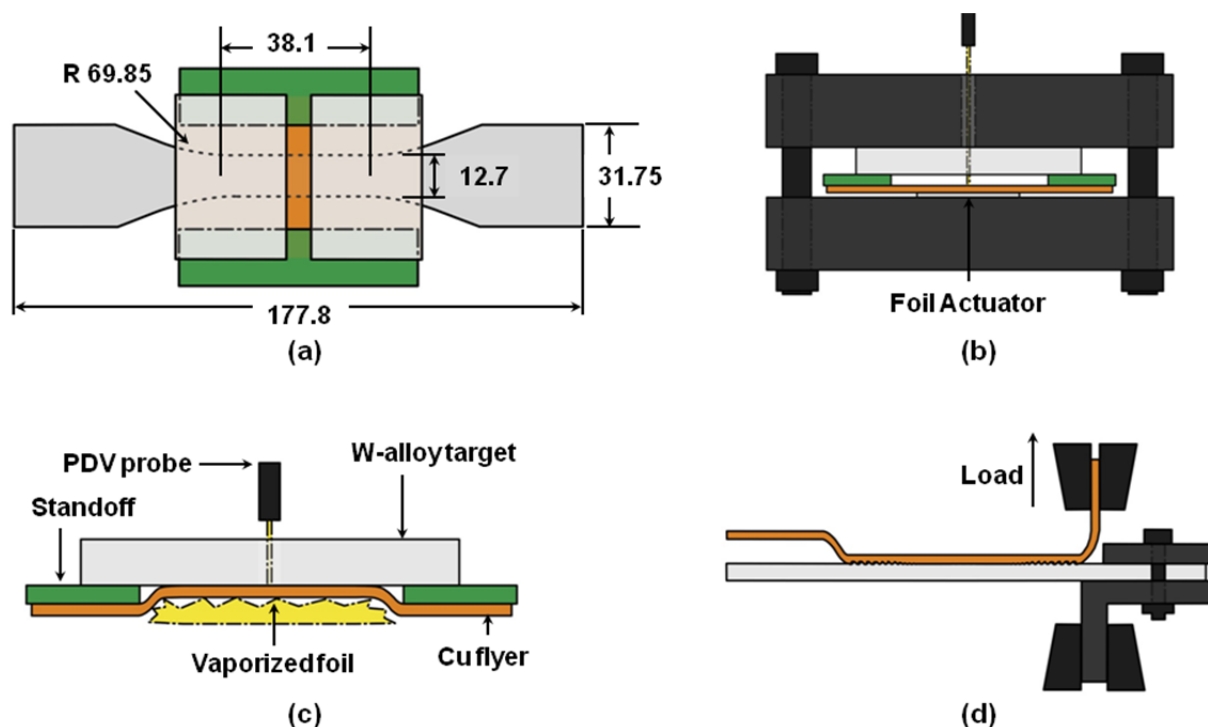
Vaporizing foil actuator welding (VFAW) set up for welding Cu110 with W-alloy. (a) top view of the foil actuator, flyer sheet, standoff, and target stack, (b) side view of the stack along with the positioning of the photonic Doppler velocimeter (PDV) probe, (c) formation of weld after foil actuator's vaporization, (d) peel testing set up.
